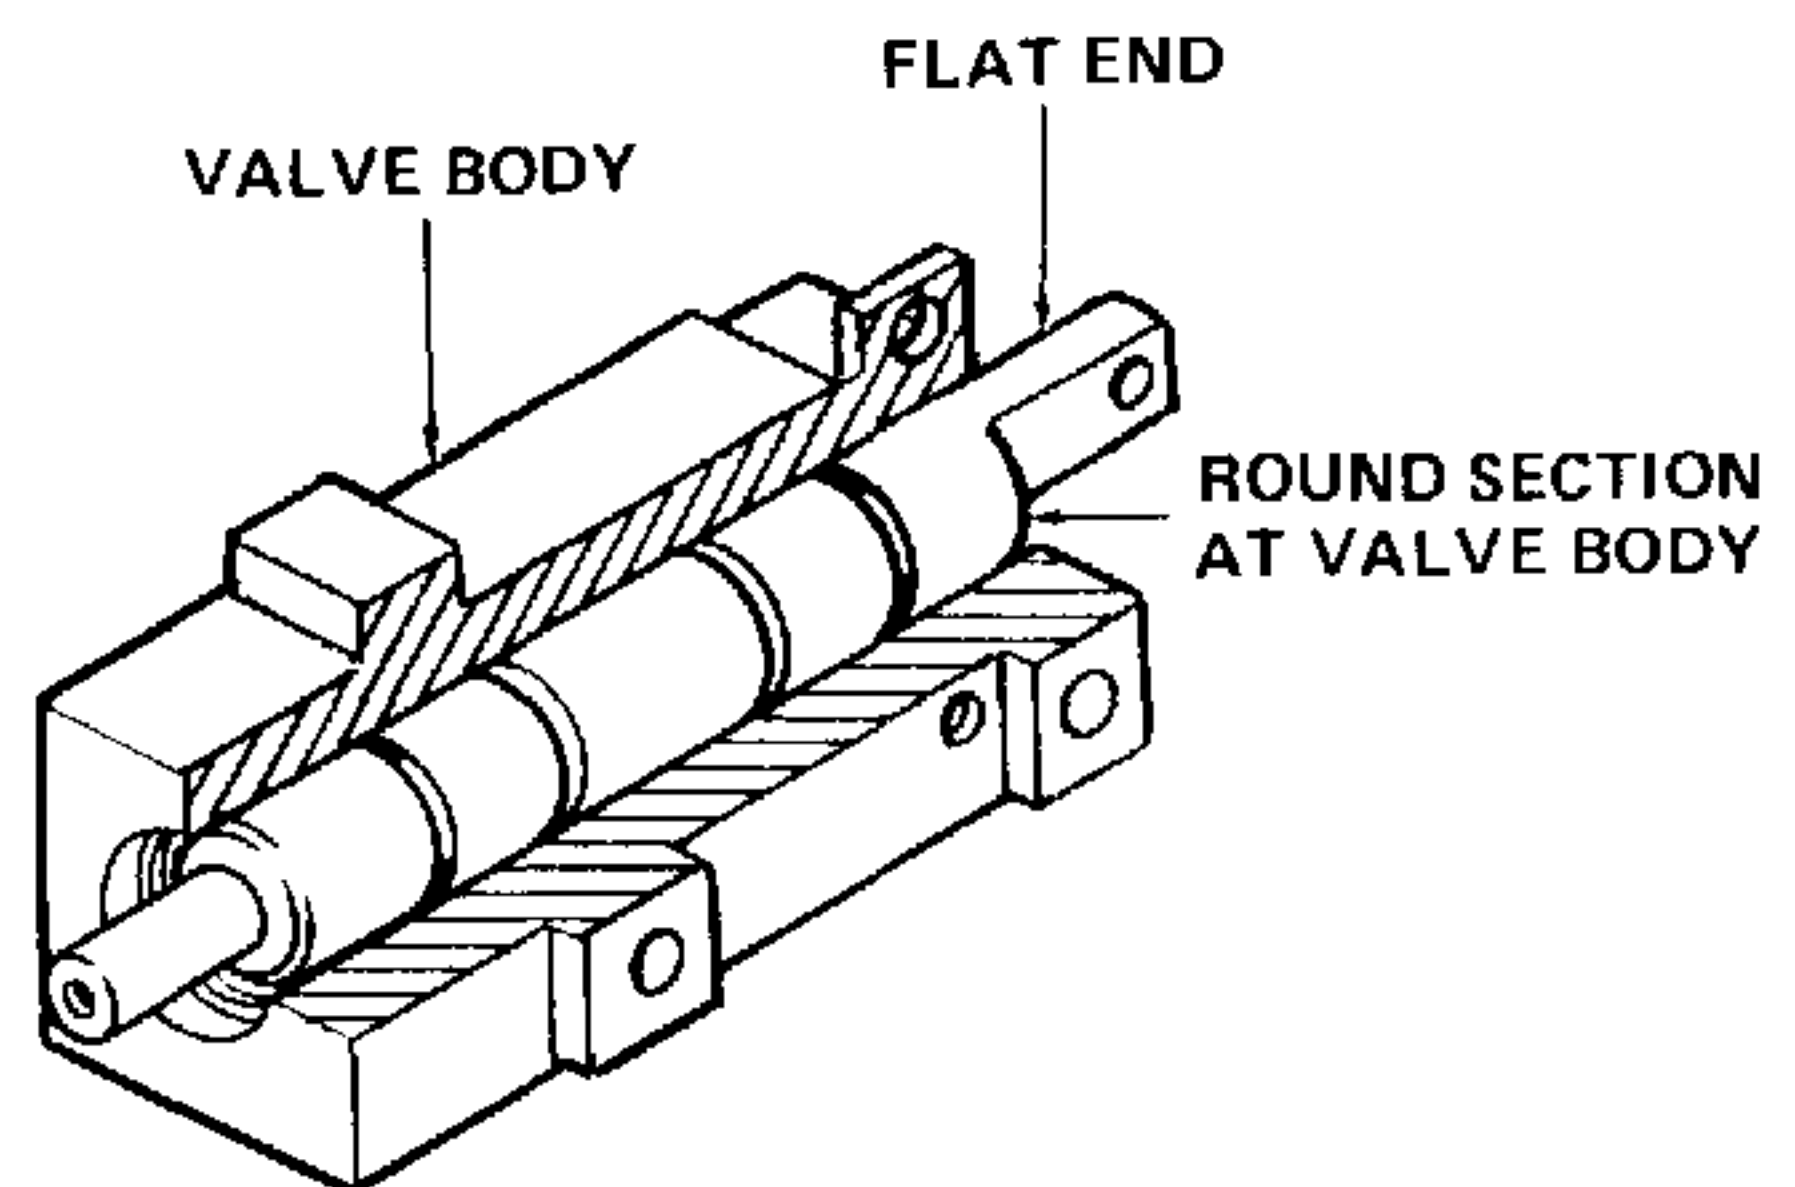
Valve Shaft Correctly Positioned In Valve Body.
